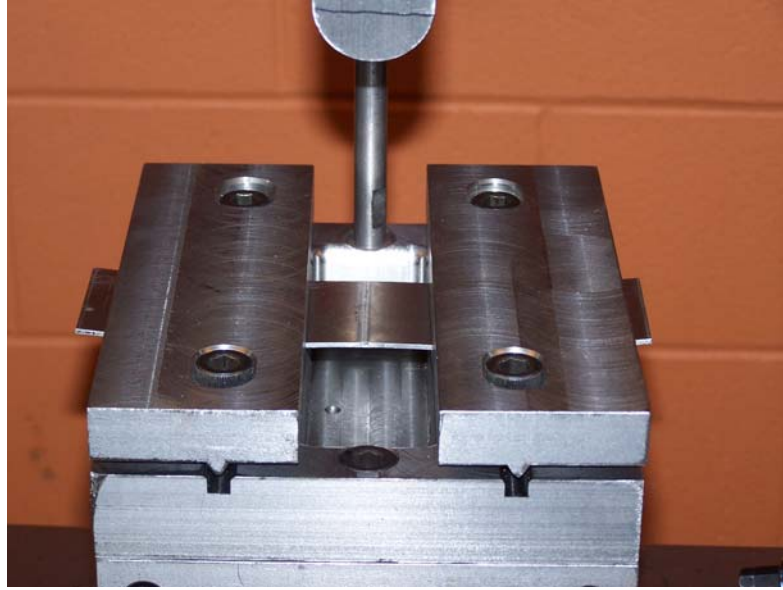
Tailor Welded Blank Set Up on Forming Die Before the Start of the Process
